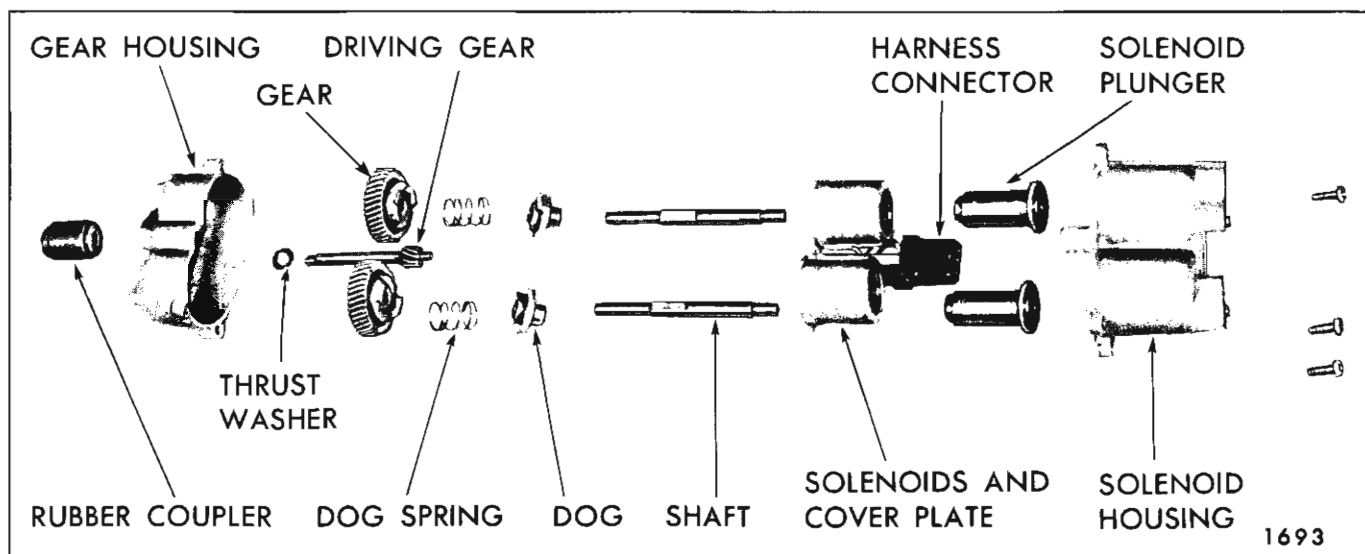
H16—Exploded View of Four-Way Seat Transmission
